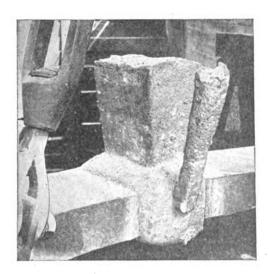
Typical Thermit Weld Showing Riser and Pouring Gate Casting Still Attached
